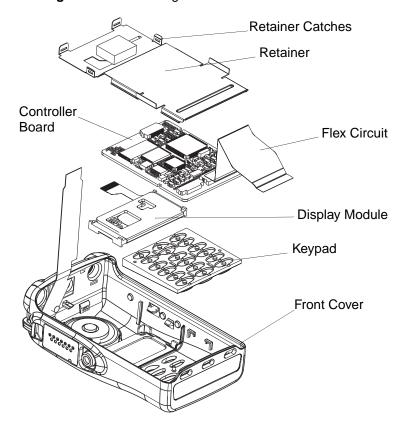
Removing the retainer, controller board, display module, and keypad from the radio body
